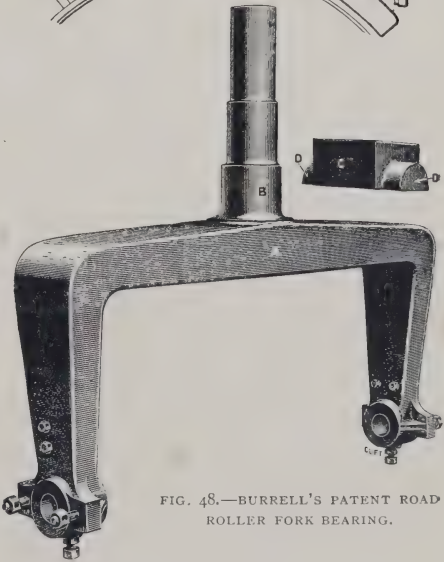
BURRELL'S PATENT ROAD ROLLER FORK BEARING.
